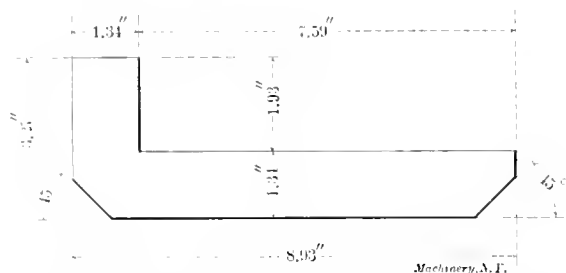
Blank produced by the Punch and Die shown in Figs. 2 and 3
